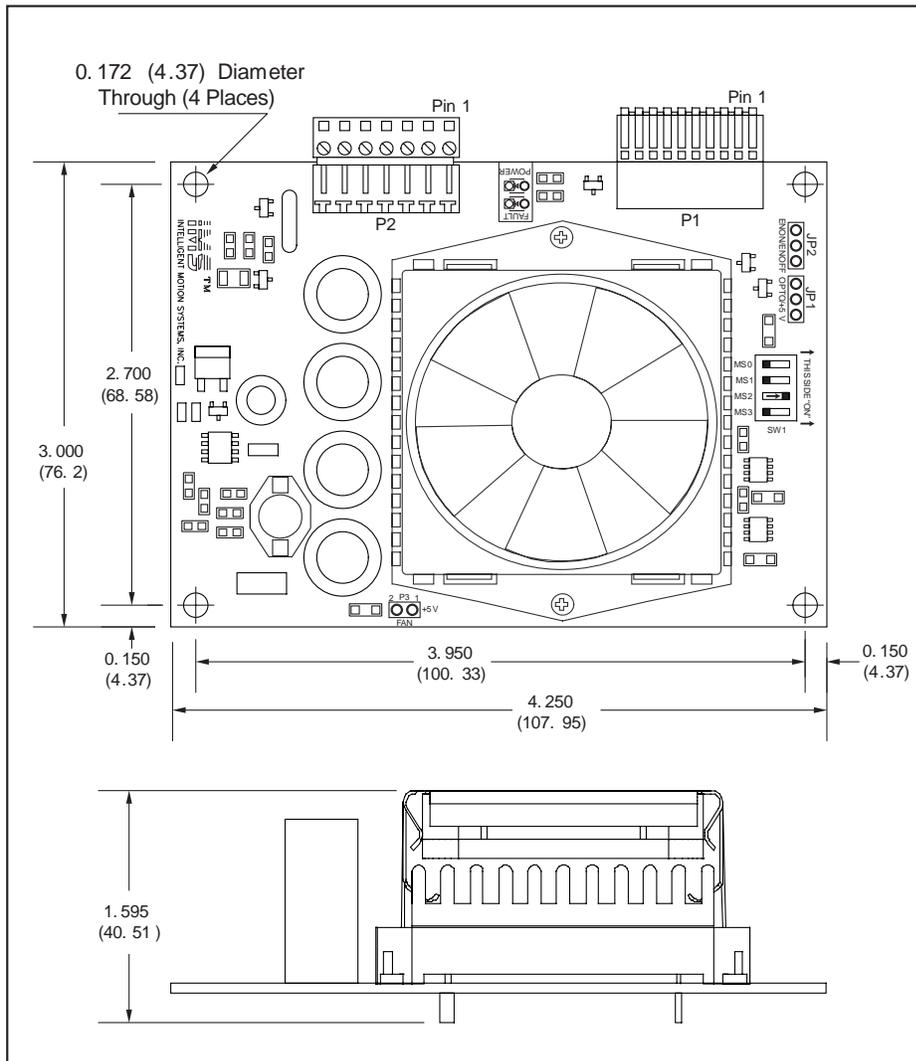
INT-483 / INT-805 Interface Board Dimensions
